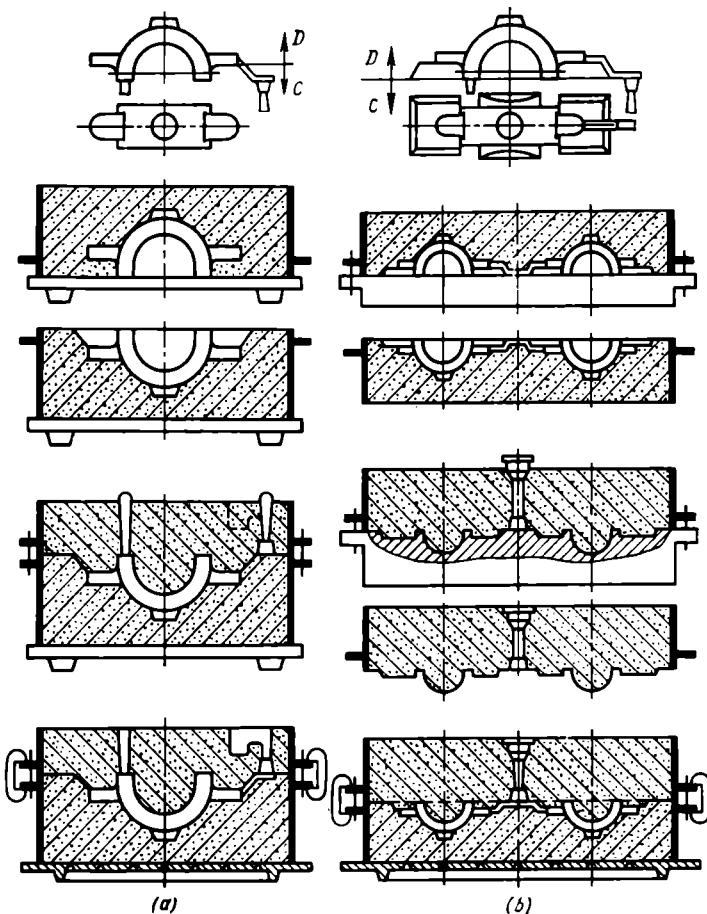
Schemes of hand (a) and machine (b) molding stages involved in the manufacture of a mold for casting a bearing cap
